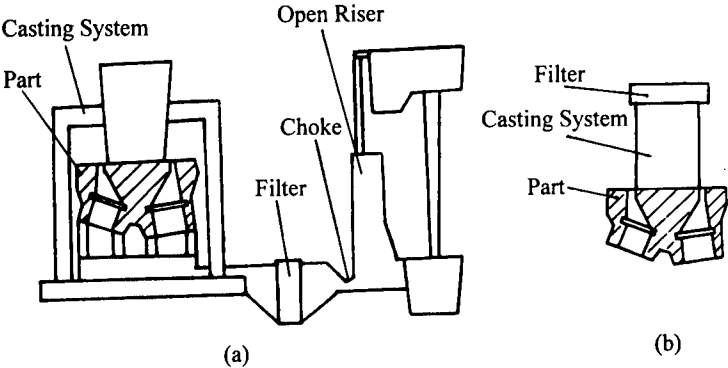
the schematic diagram of the typical casting system of pump-housing part investment casting (a) free gravity casting, (b) vacuum differential pressure casting.
